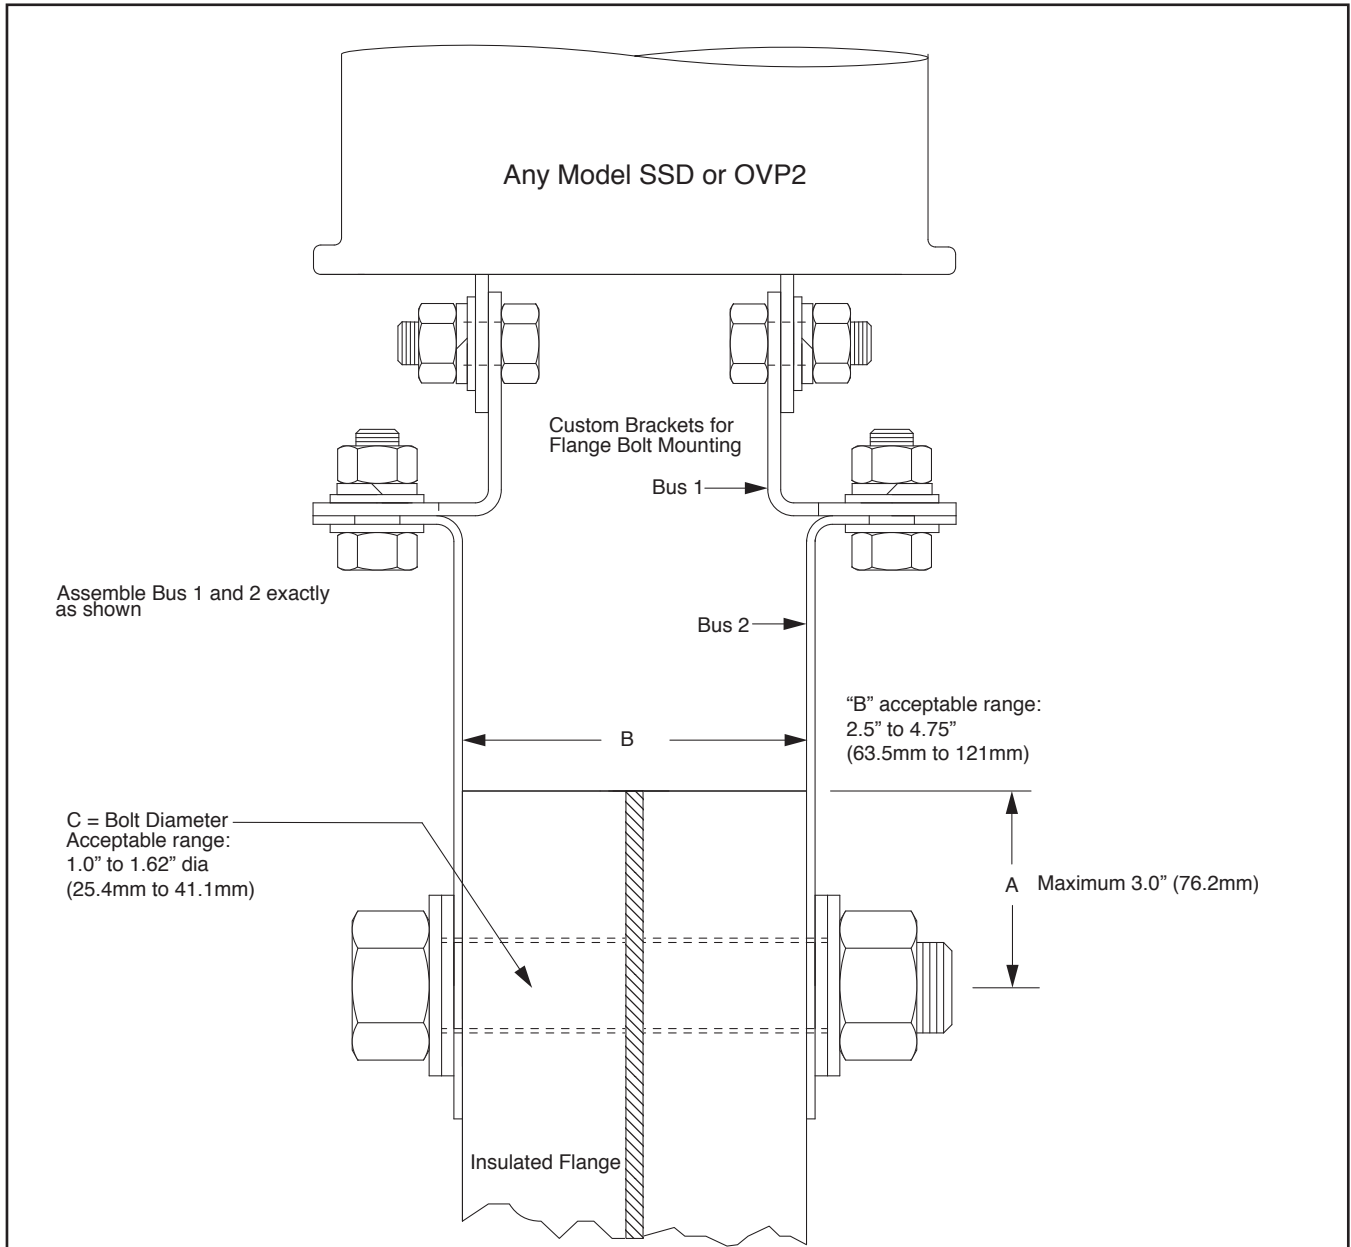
A Flange Mount Using Existing Flange Bolts
